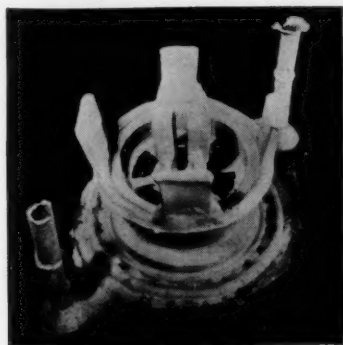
CASTING WITH GATES AND RISERS ATTACHED.
